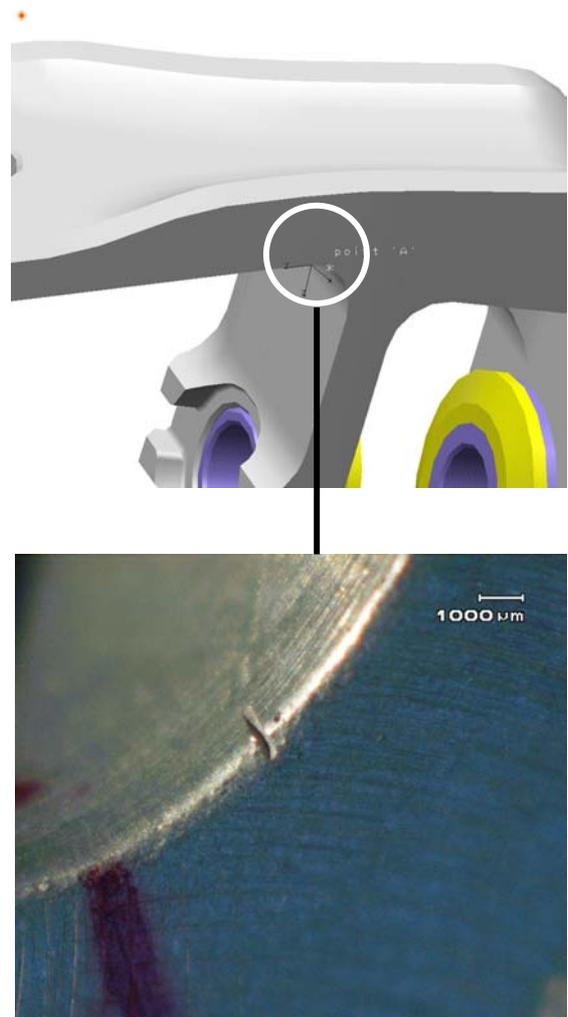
T/R Blade Damper Attachment 0.2 mm initial flaw
